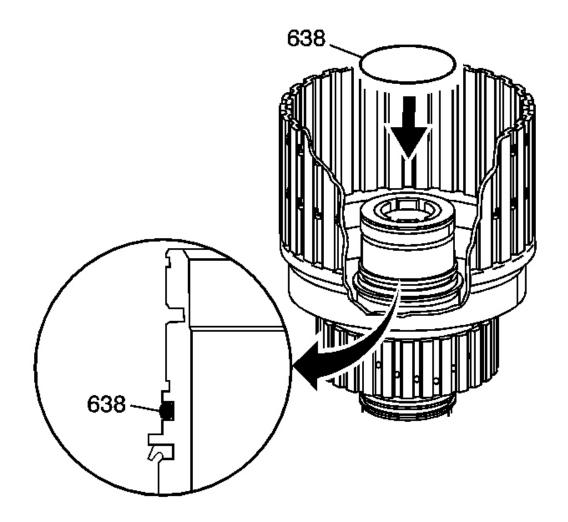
View Of Third Clutch Housing O-Ring Seal Courtesy of GENERAL MOTORS CORP.
